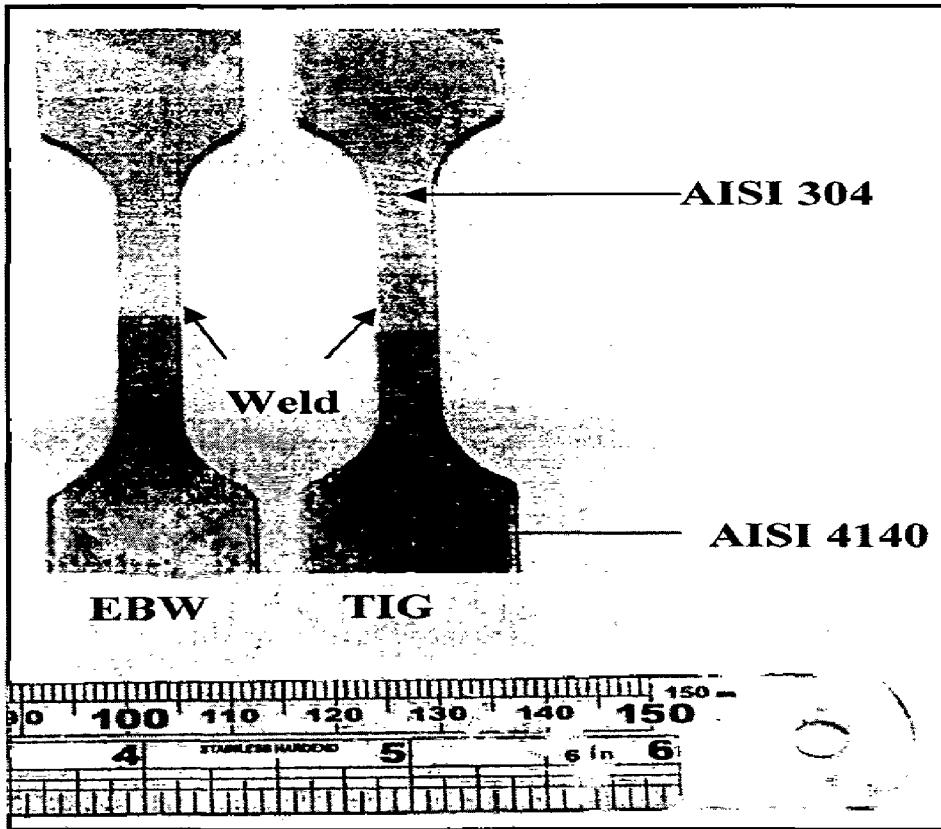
Tensile specimen for EBW and TIG welded sample
